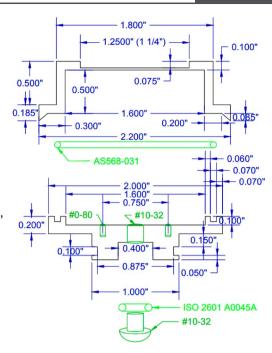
Schematic showing the dimensions of the machined air-free XPS sampletransfer holder cap and base. Not shown is the upper cut-out ofhe sample holdeListed in green are the O-rings and screws listed in the materials section wellas the screw holes tapped into the base. Full schematic with all labeled peripherals can be found in the Supporting Information and Figure S1.
